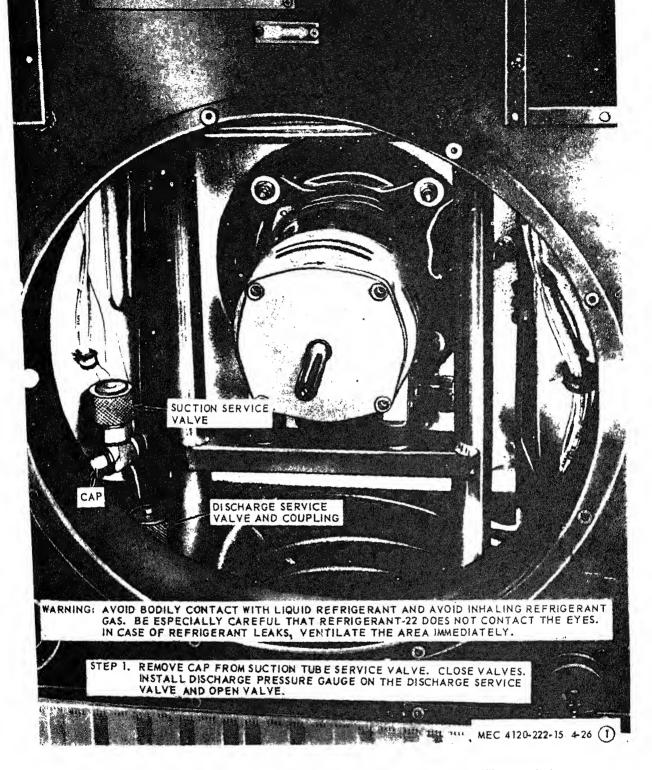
Pressure testing and evacuating the refrigerant system. (Sheet 1 of 3)
